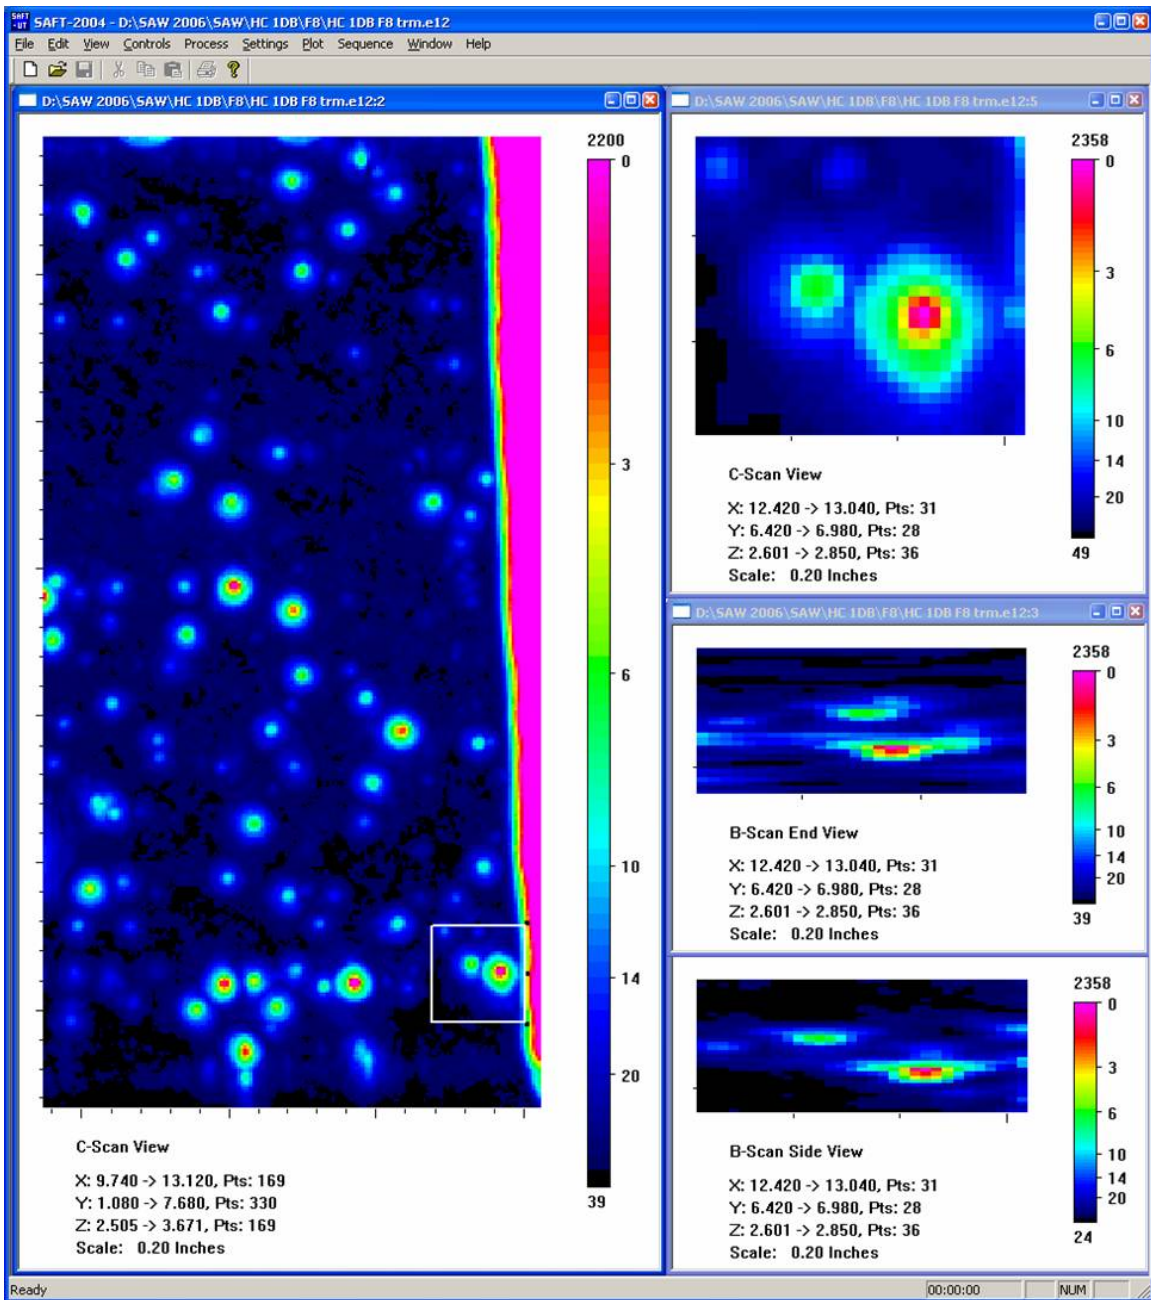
a 10 MHz F8 Immersion Testing Images of Small Fabrication Flaw: *HC4A*. This figure shows immersion testing data of a 7-mm flaw indication from the weld-normal testing of large weld segments. The flaw indication is identified in the box drawn in the SAFT-UT image on the left in the figure.
